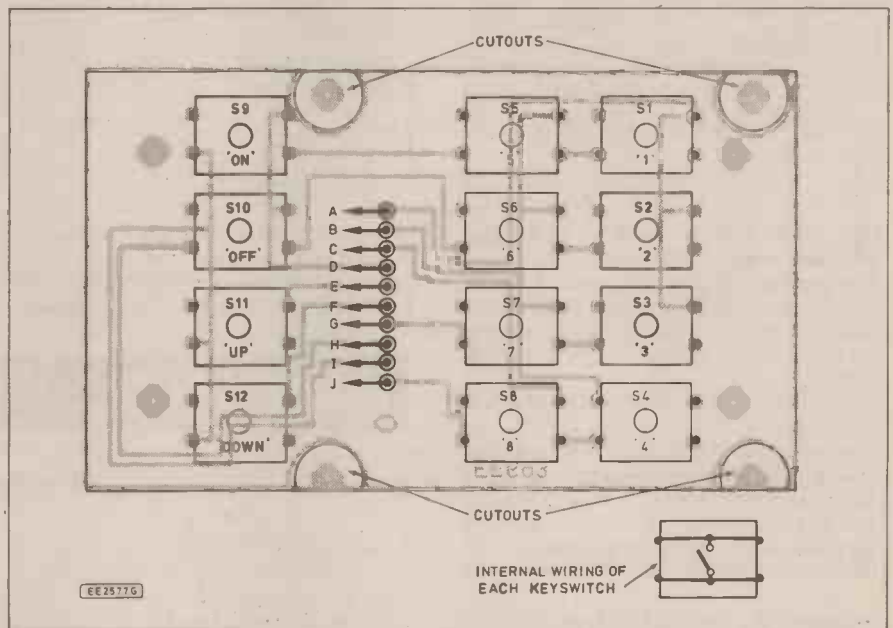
Printed circuit board component layout and full size copper foil master pattern for the keyswitch board. The photograph on the left shows the "keypad" layout on the handheld case.
